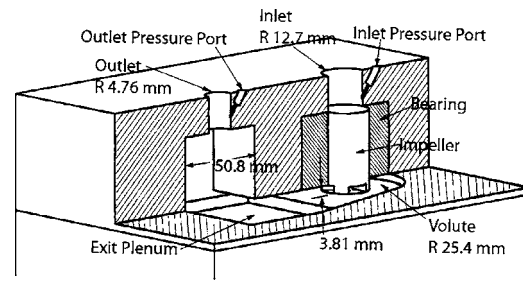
Cutaway view of the pump assembly including the impeller, bearings, casing, volute, inlet, and outlet
